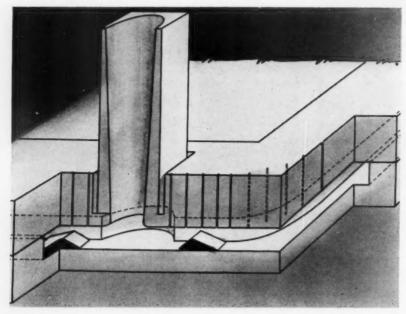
(Left)—Sprue base design for Mold B showing streamlined inserts placed in runner on both sides of enlargement at sprue base. Dimensions of sprue, runners, and gates are same as shown by Fig. 1, and enlargement is same as that shown in Fig. 4. Streamlined inserts are 1 in. wide and, therefore, extend all the way across runner and are 36 in. high at highest point and 1½ in. long.
